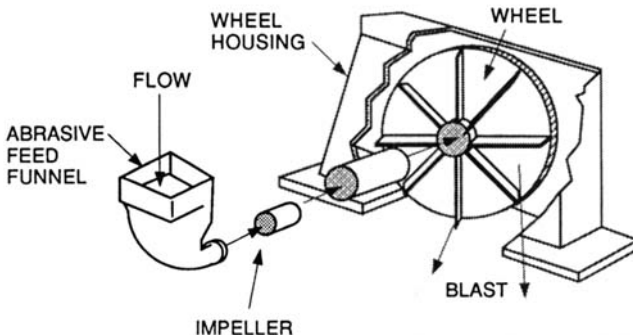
Centrifugal impeller for fixed abrasive blasting systems.
